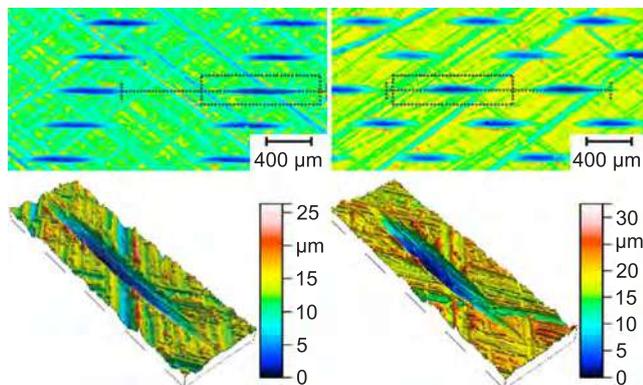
Cylinder surface with prismatic inserts by honing [25].
